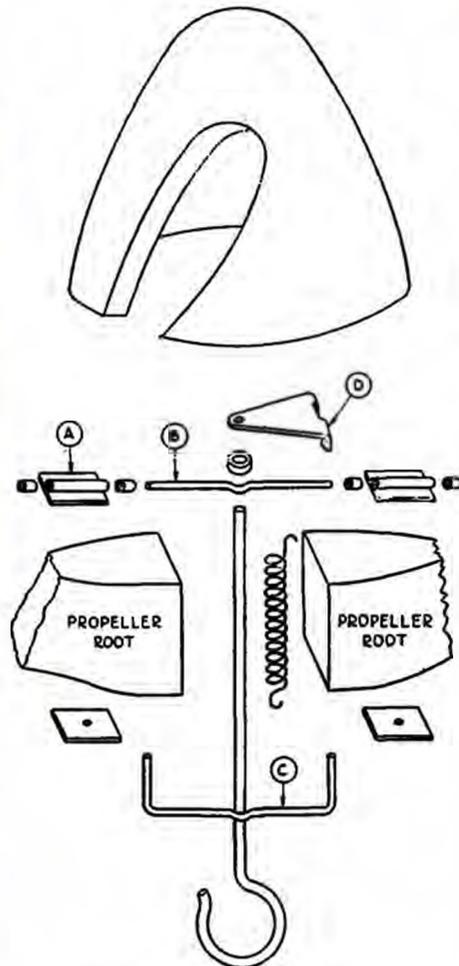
Exploded view, showing components of variable-pitch propeller.
